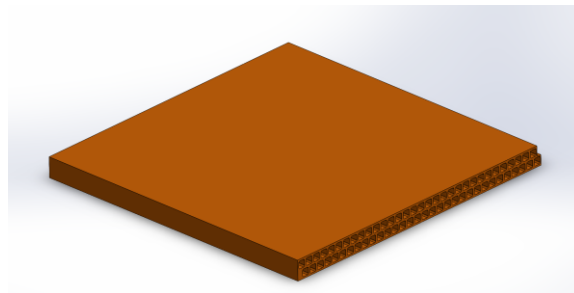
Initial prototype channel geometry. The figure shows 1 out of 8 channels required for complete assembly
